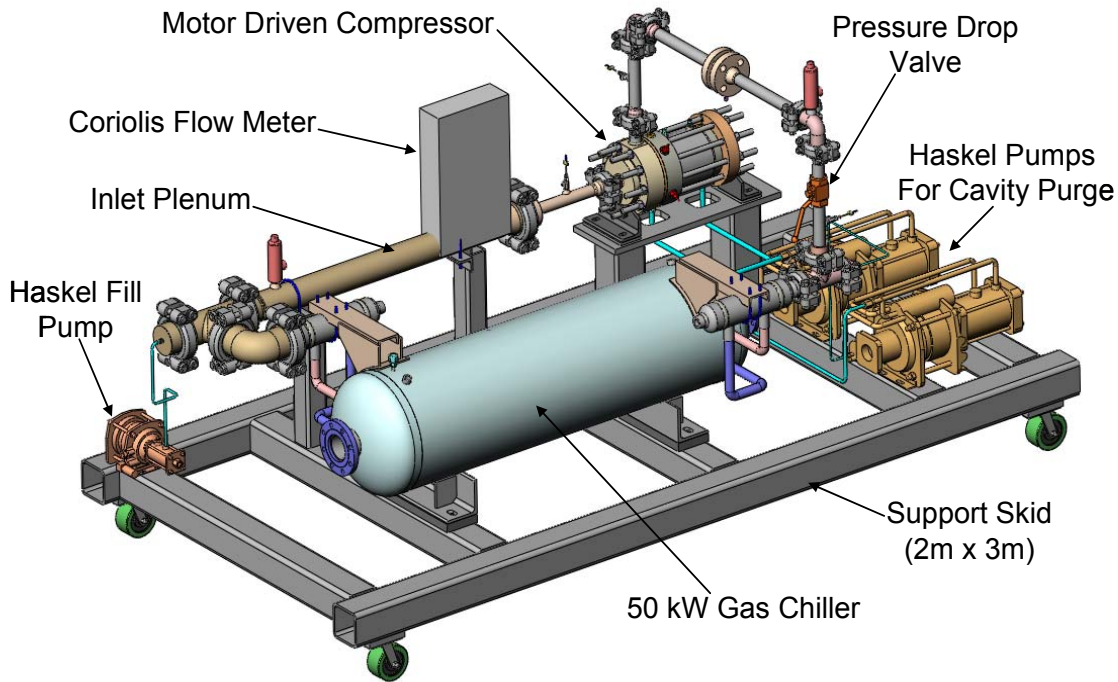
Engineering drawing of S-CO₂ Compression loop test skid.
